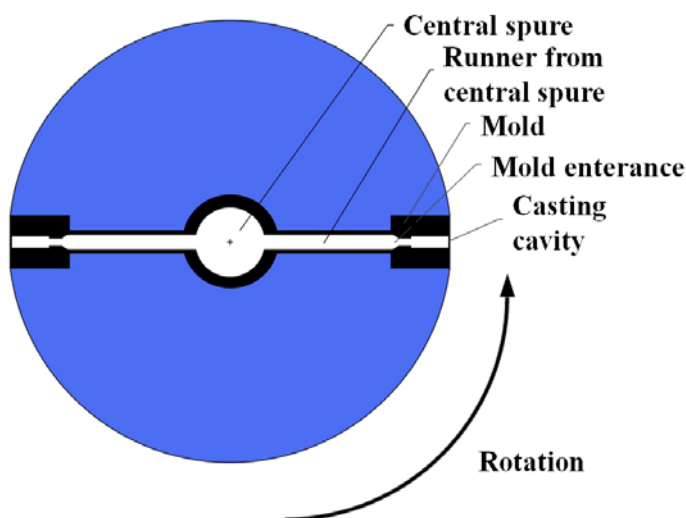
Schematic setup of a centrifugal casting mold entrance.
